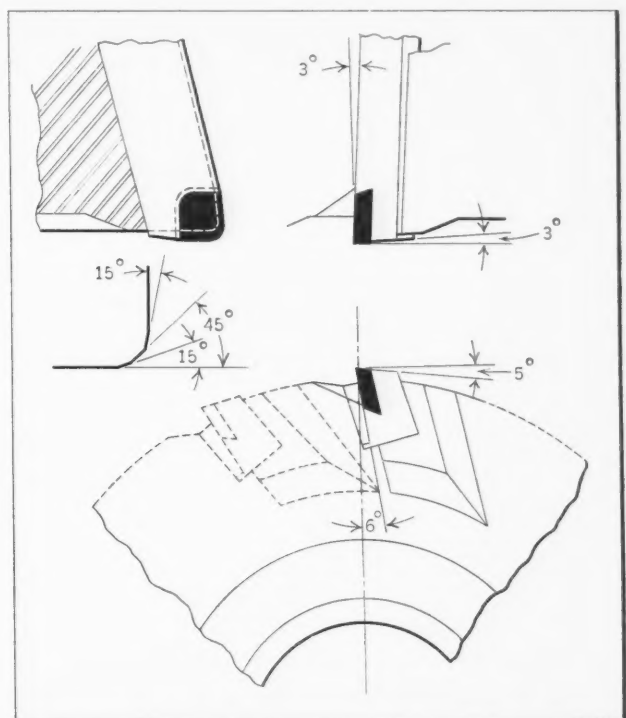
Face, Rake, and Clearance Angles on Cutters for Milling Cast Iron
